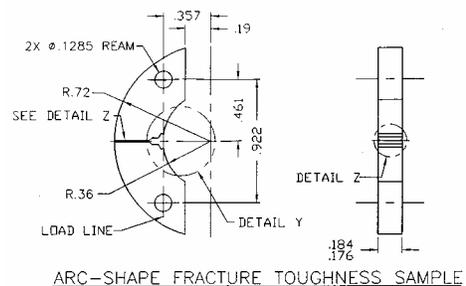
Shape and Dimensions of Fracture-Toughness Sample. Dimensions shown are in Inches.
